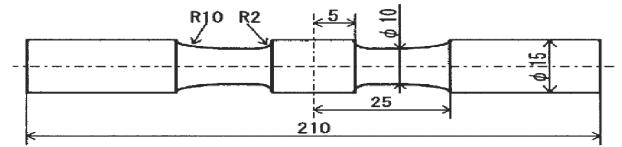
Geometry of rotating-bending fatigue, and bending test specimen.
